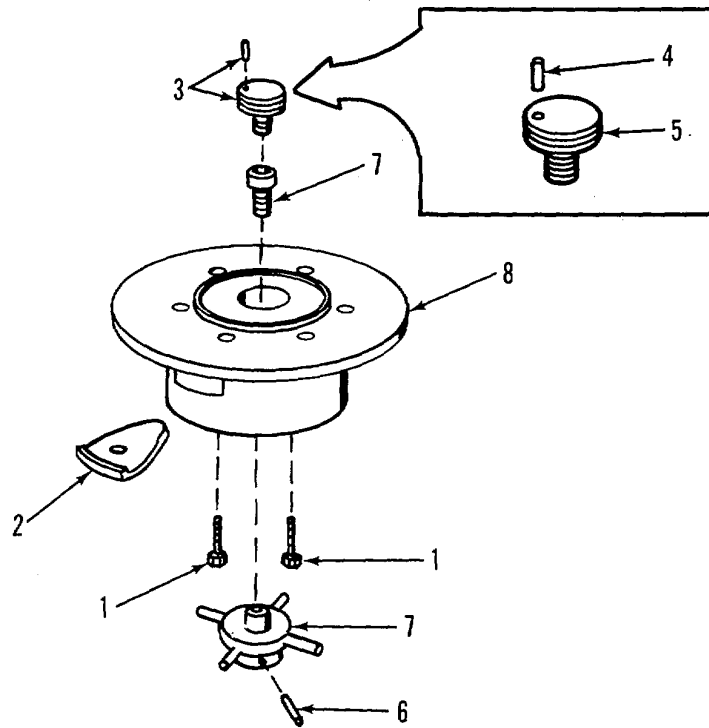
Rifle mount adapter assembly and collar and pin assembly.
